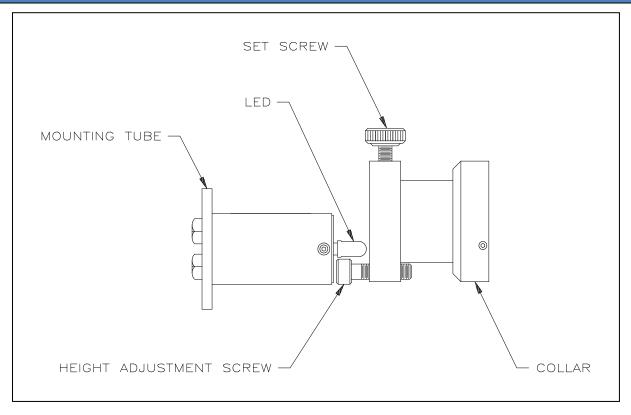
IS-730 HEIGHT ADJUSTMENT
